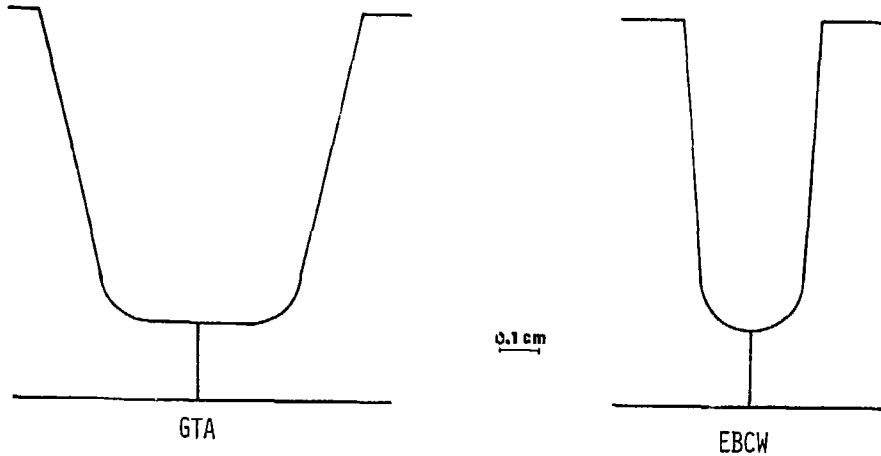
Weld joint geometrics of 1.5 cm wall thickness cylinders showing the much wider groove used for the GTA process compared to that of the EBCW process.
